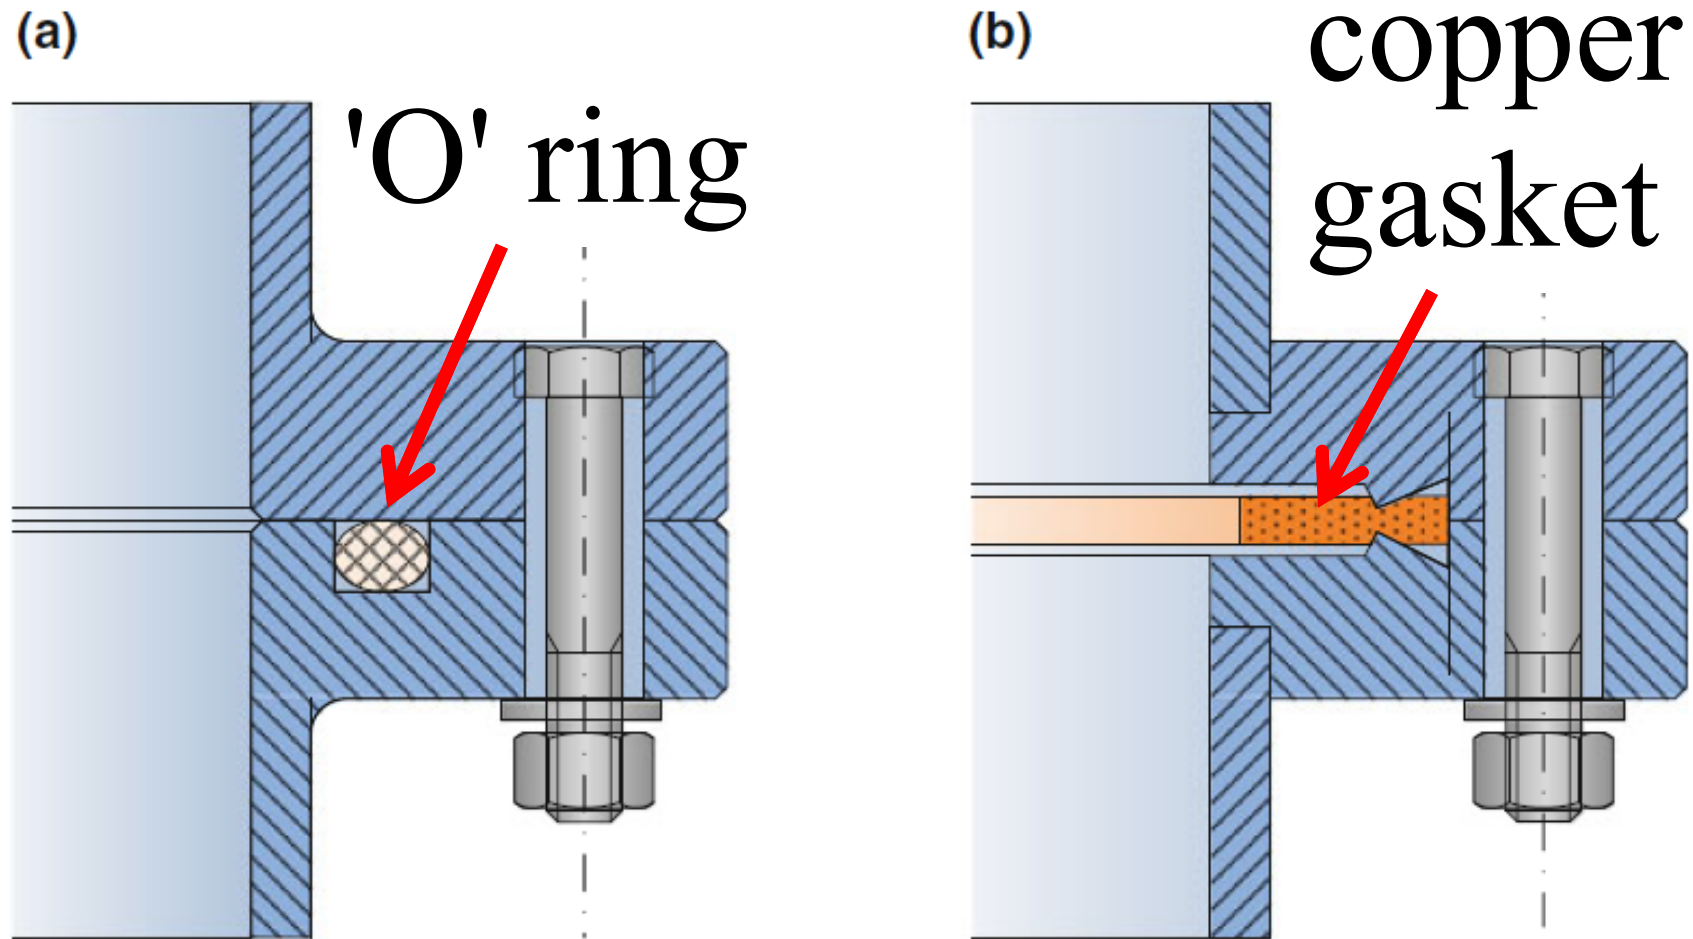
High vacuum seals (adapted from O'Hanlon [1]). a O-ring in rectangular groove. b ConFlat[®] type knife edge metal seal
